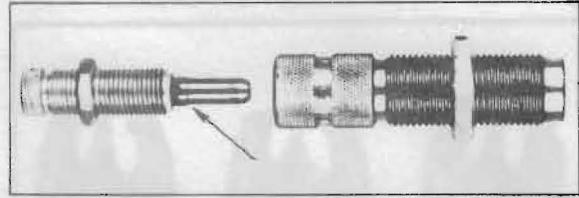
Conventional sizing dies are usually employed in resizing cases for cast bullets. Special dies are available. The Lyman sizer die illustrated incorporates an expander plug with a shoulder (arrow) which slightly flares out the case mouth to minimize bullet shaving. In the bullet seating operation, the flare is "ironed out" by the crimper.
